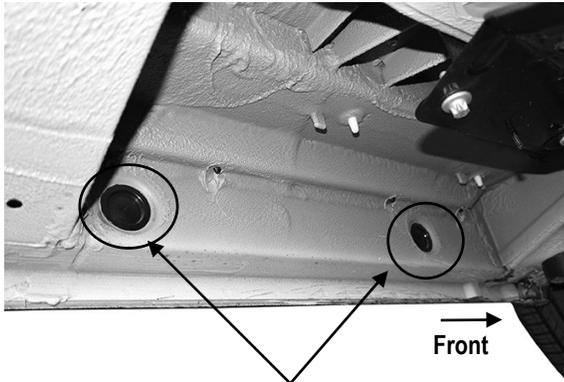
Mark location of each Support Bracket onto pinch weld before drilling
